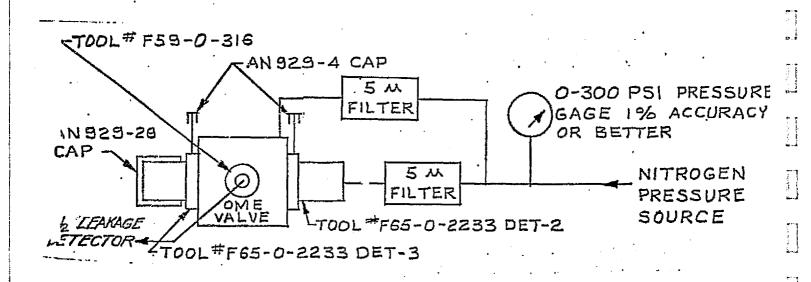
C #2 SHAFT SEAL LEAKAGE
